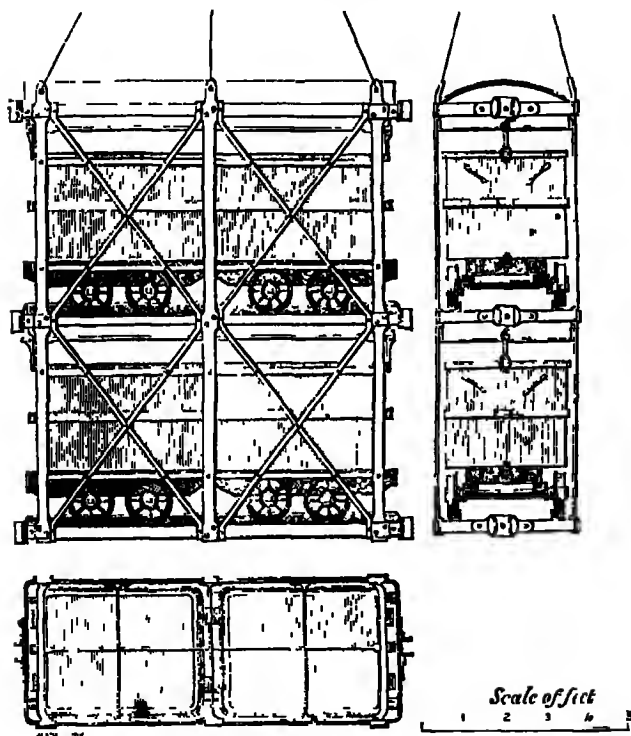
Steel cage, North Seaton, with four tubs Elevations and plan
